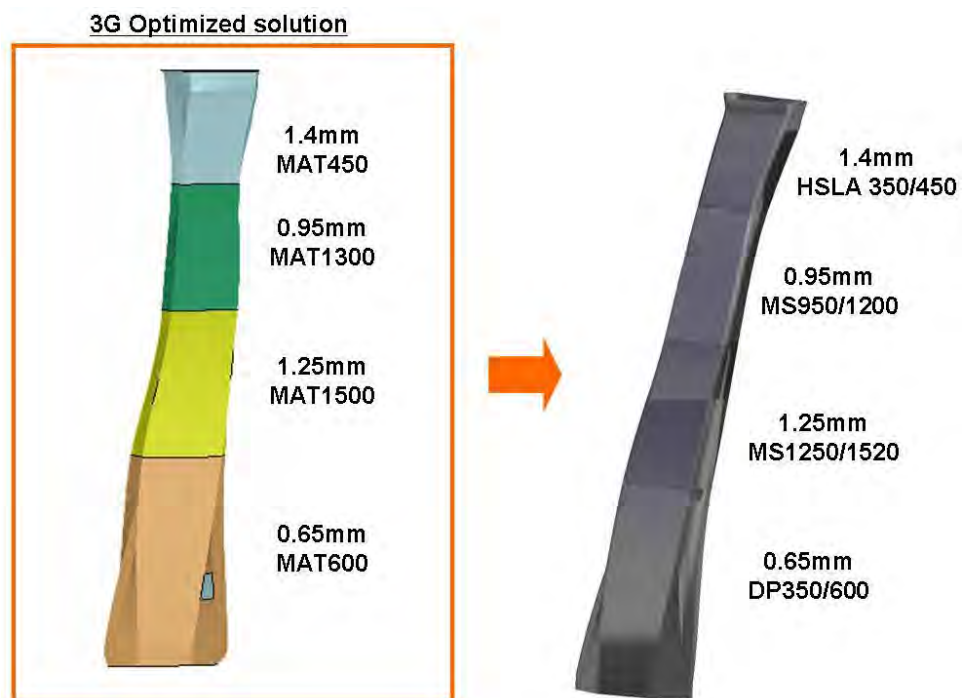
B-pillar - hydroformed LWT solution with stamped B-pillar outer (not shown)
